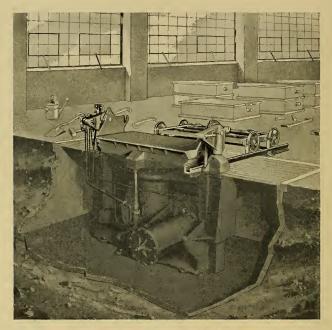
A 34"x64" Roll-Over Jolt-Moulding Machine, having a lifting capacity of 2,000 pounds.
